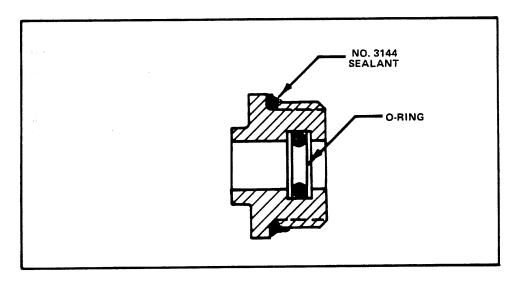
Lubrication of the O-rings and sealing for the cam-switches.
